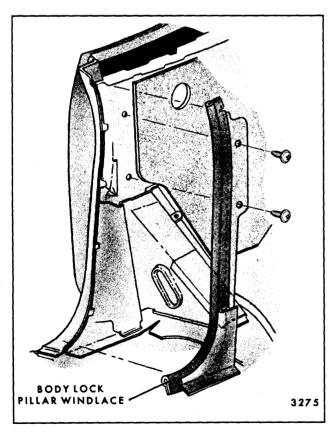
Body Lock Pillar Windlace Assembly - "A-B & C- 37, 47, 57, 67 and 87" Styles
